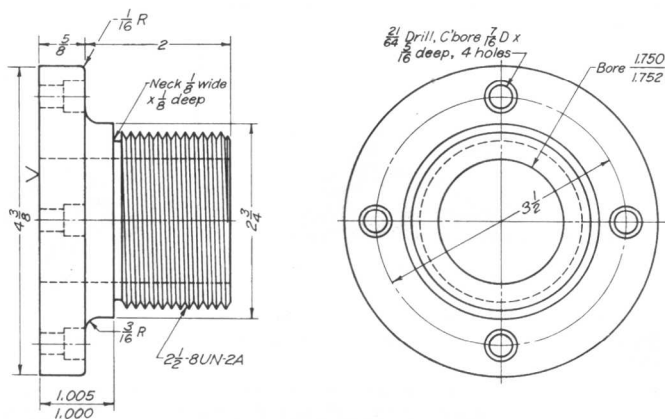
Example of a two-view drawing drawn by hand-held instruments. The lettering is freehand.
